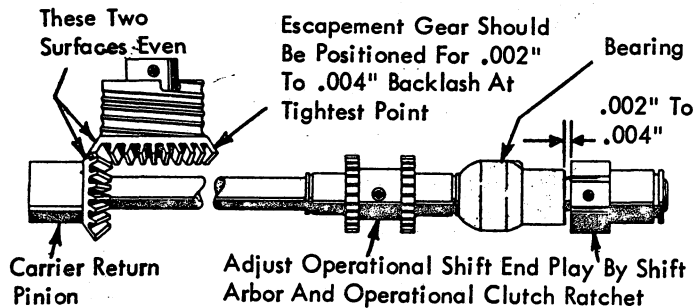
Gear Mesh And Operational Shaft Adjustment
